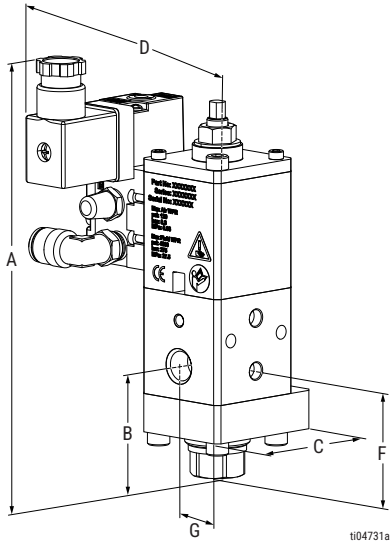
Dimensions for Ball Seat iQ Dispense Valve
